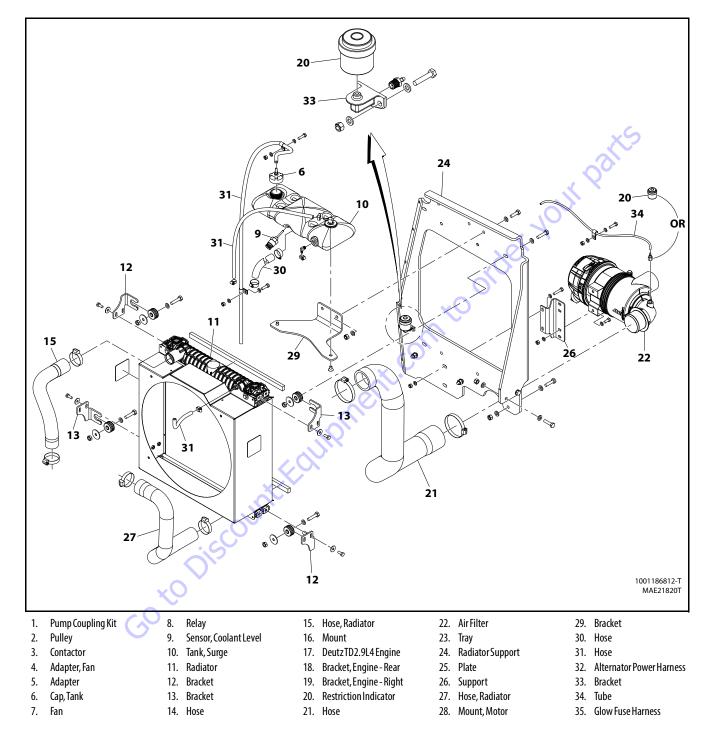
Deutz TD2.9 L4 (67hp) Engine Assembly - Sheet 1 of 2
